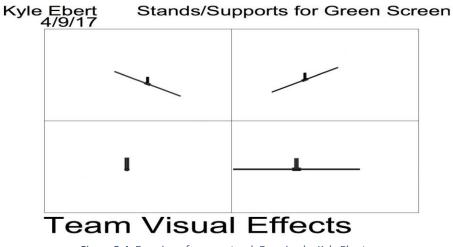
Drawing of screen stand. Drawing by Kyle Ebert.
